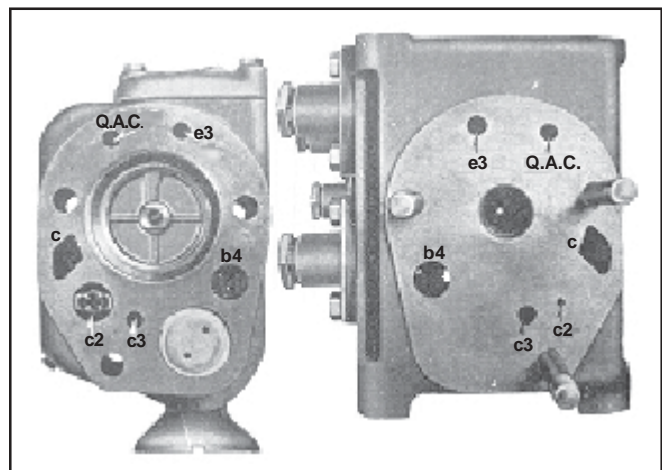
Bolting Faces - Emergency Portion & Pipe Bracket Emergency Face
